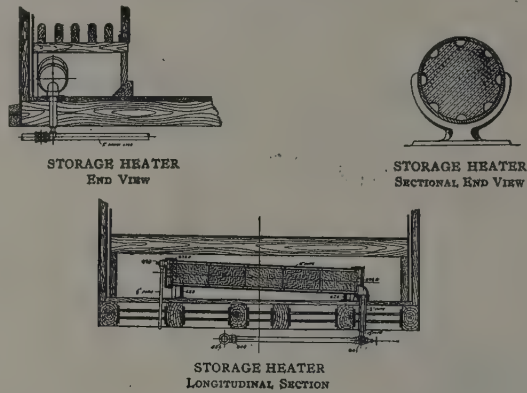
Gold Improved Storage Heater for Use in Refrigerator Cars During Cold Weather. Gold Car Heating & Lighting Company.
